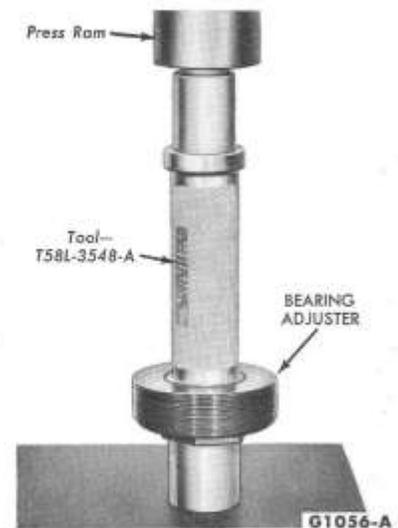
Steering Shaft Upper Bearing Cup Installation
